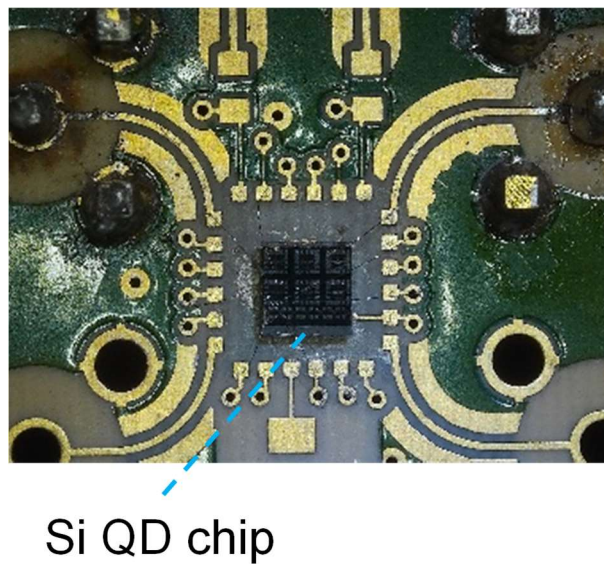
Picture of the Si QD chip mounted on a PCB.
